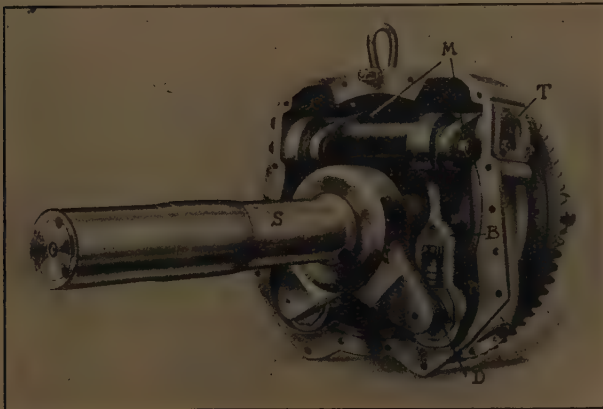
Driving axle with drive mechanism, support and gear wheels of the express locomotives, series 1670 of the Austrian Federal Railways.
